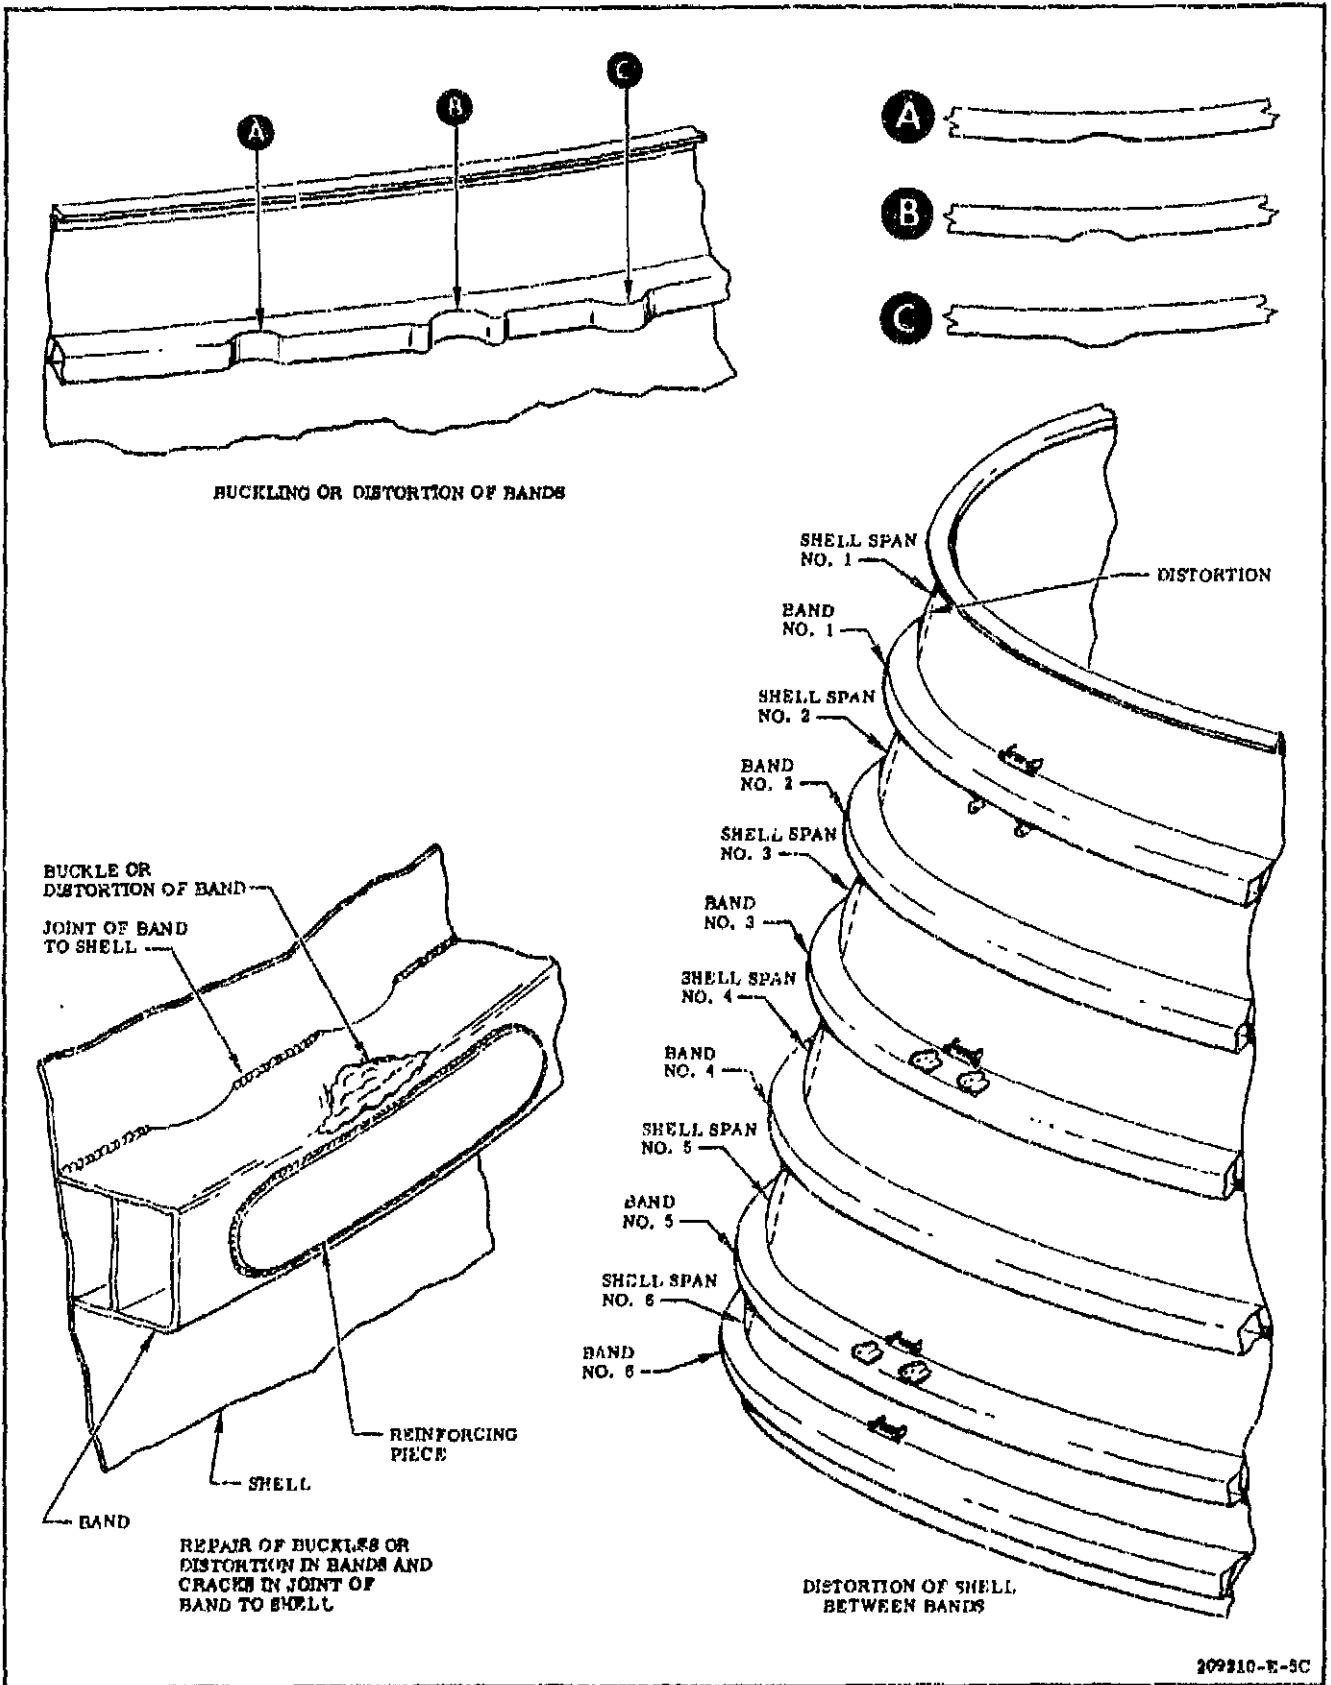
Thrust Chamber Nozzle Extension Exterior Damage
